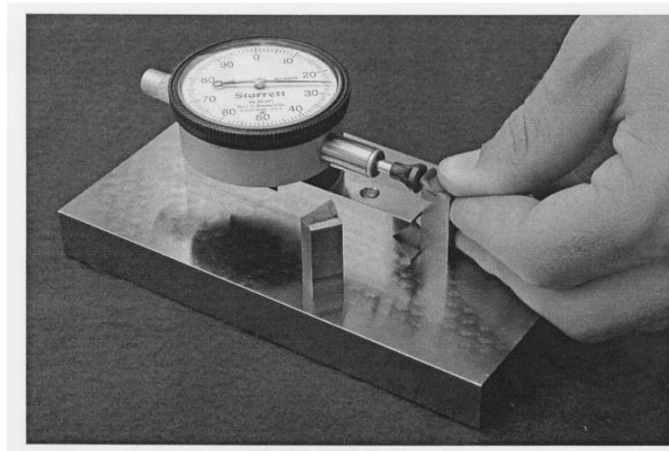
Lateral Expansion Gauge for Charpy Impact Specimens
